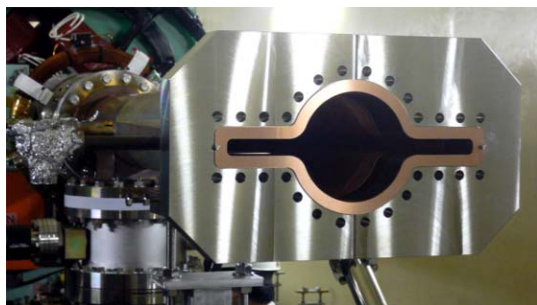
MO-type connection flange and copper gasket for beam ducts with ante-chambers.
